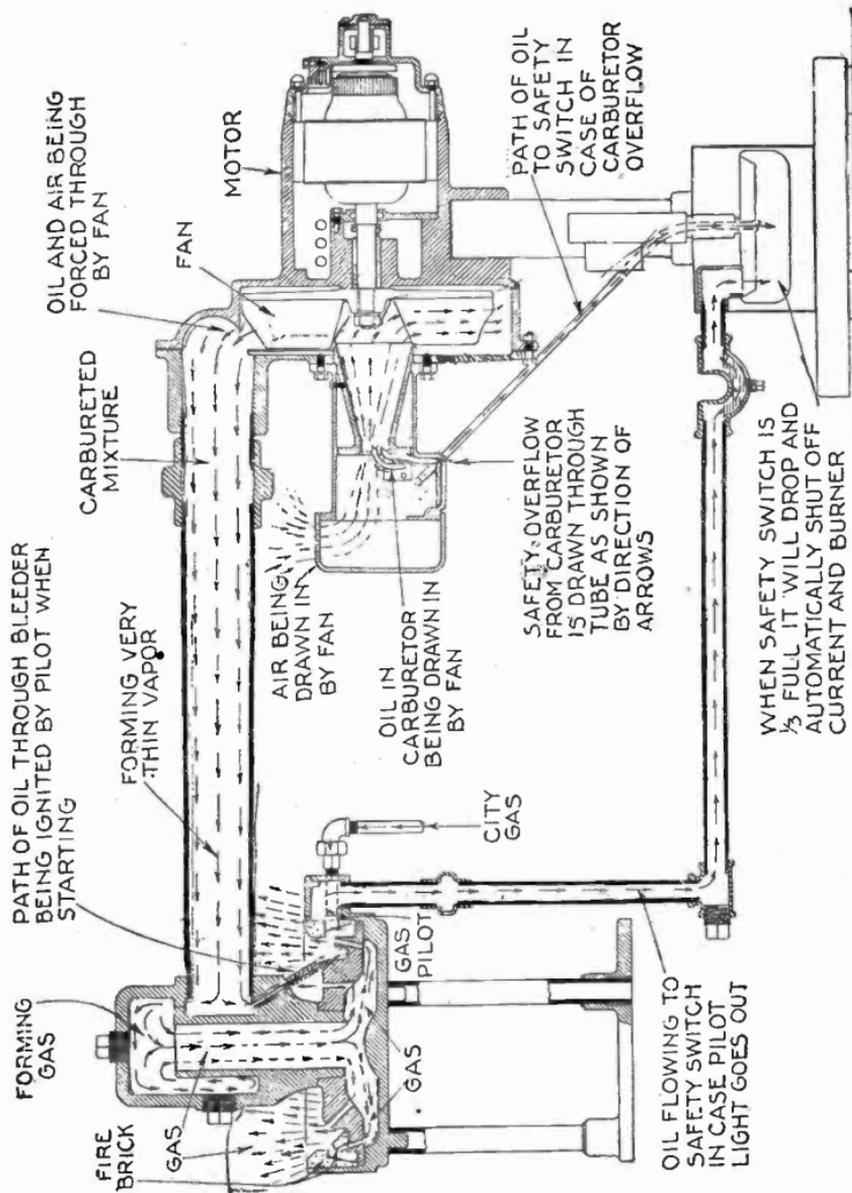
,702.—Crystal mixing vaporizing burner. Sectional view showing operation.
